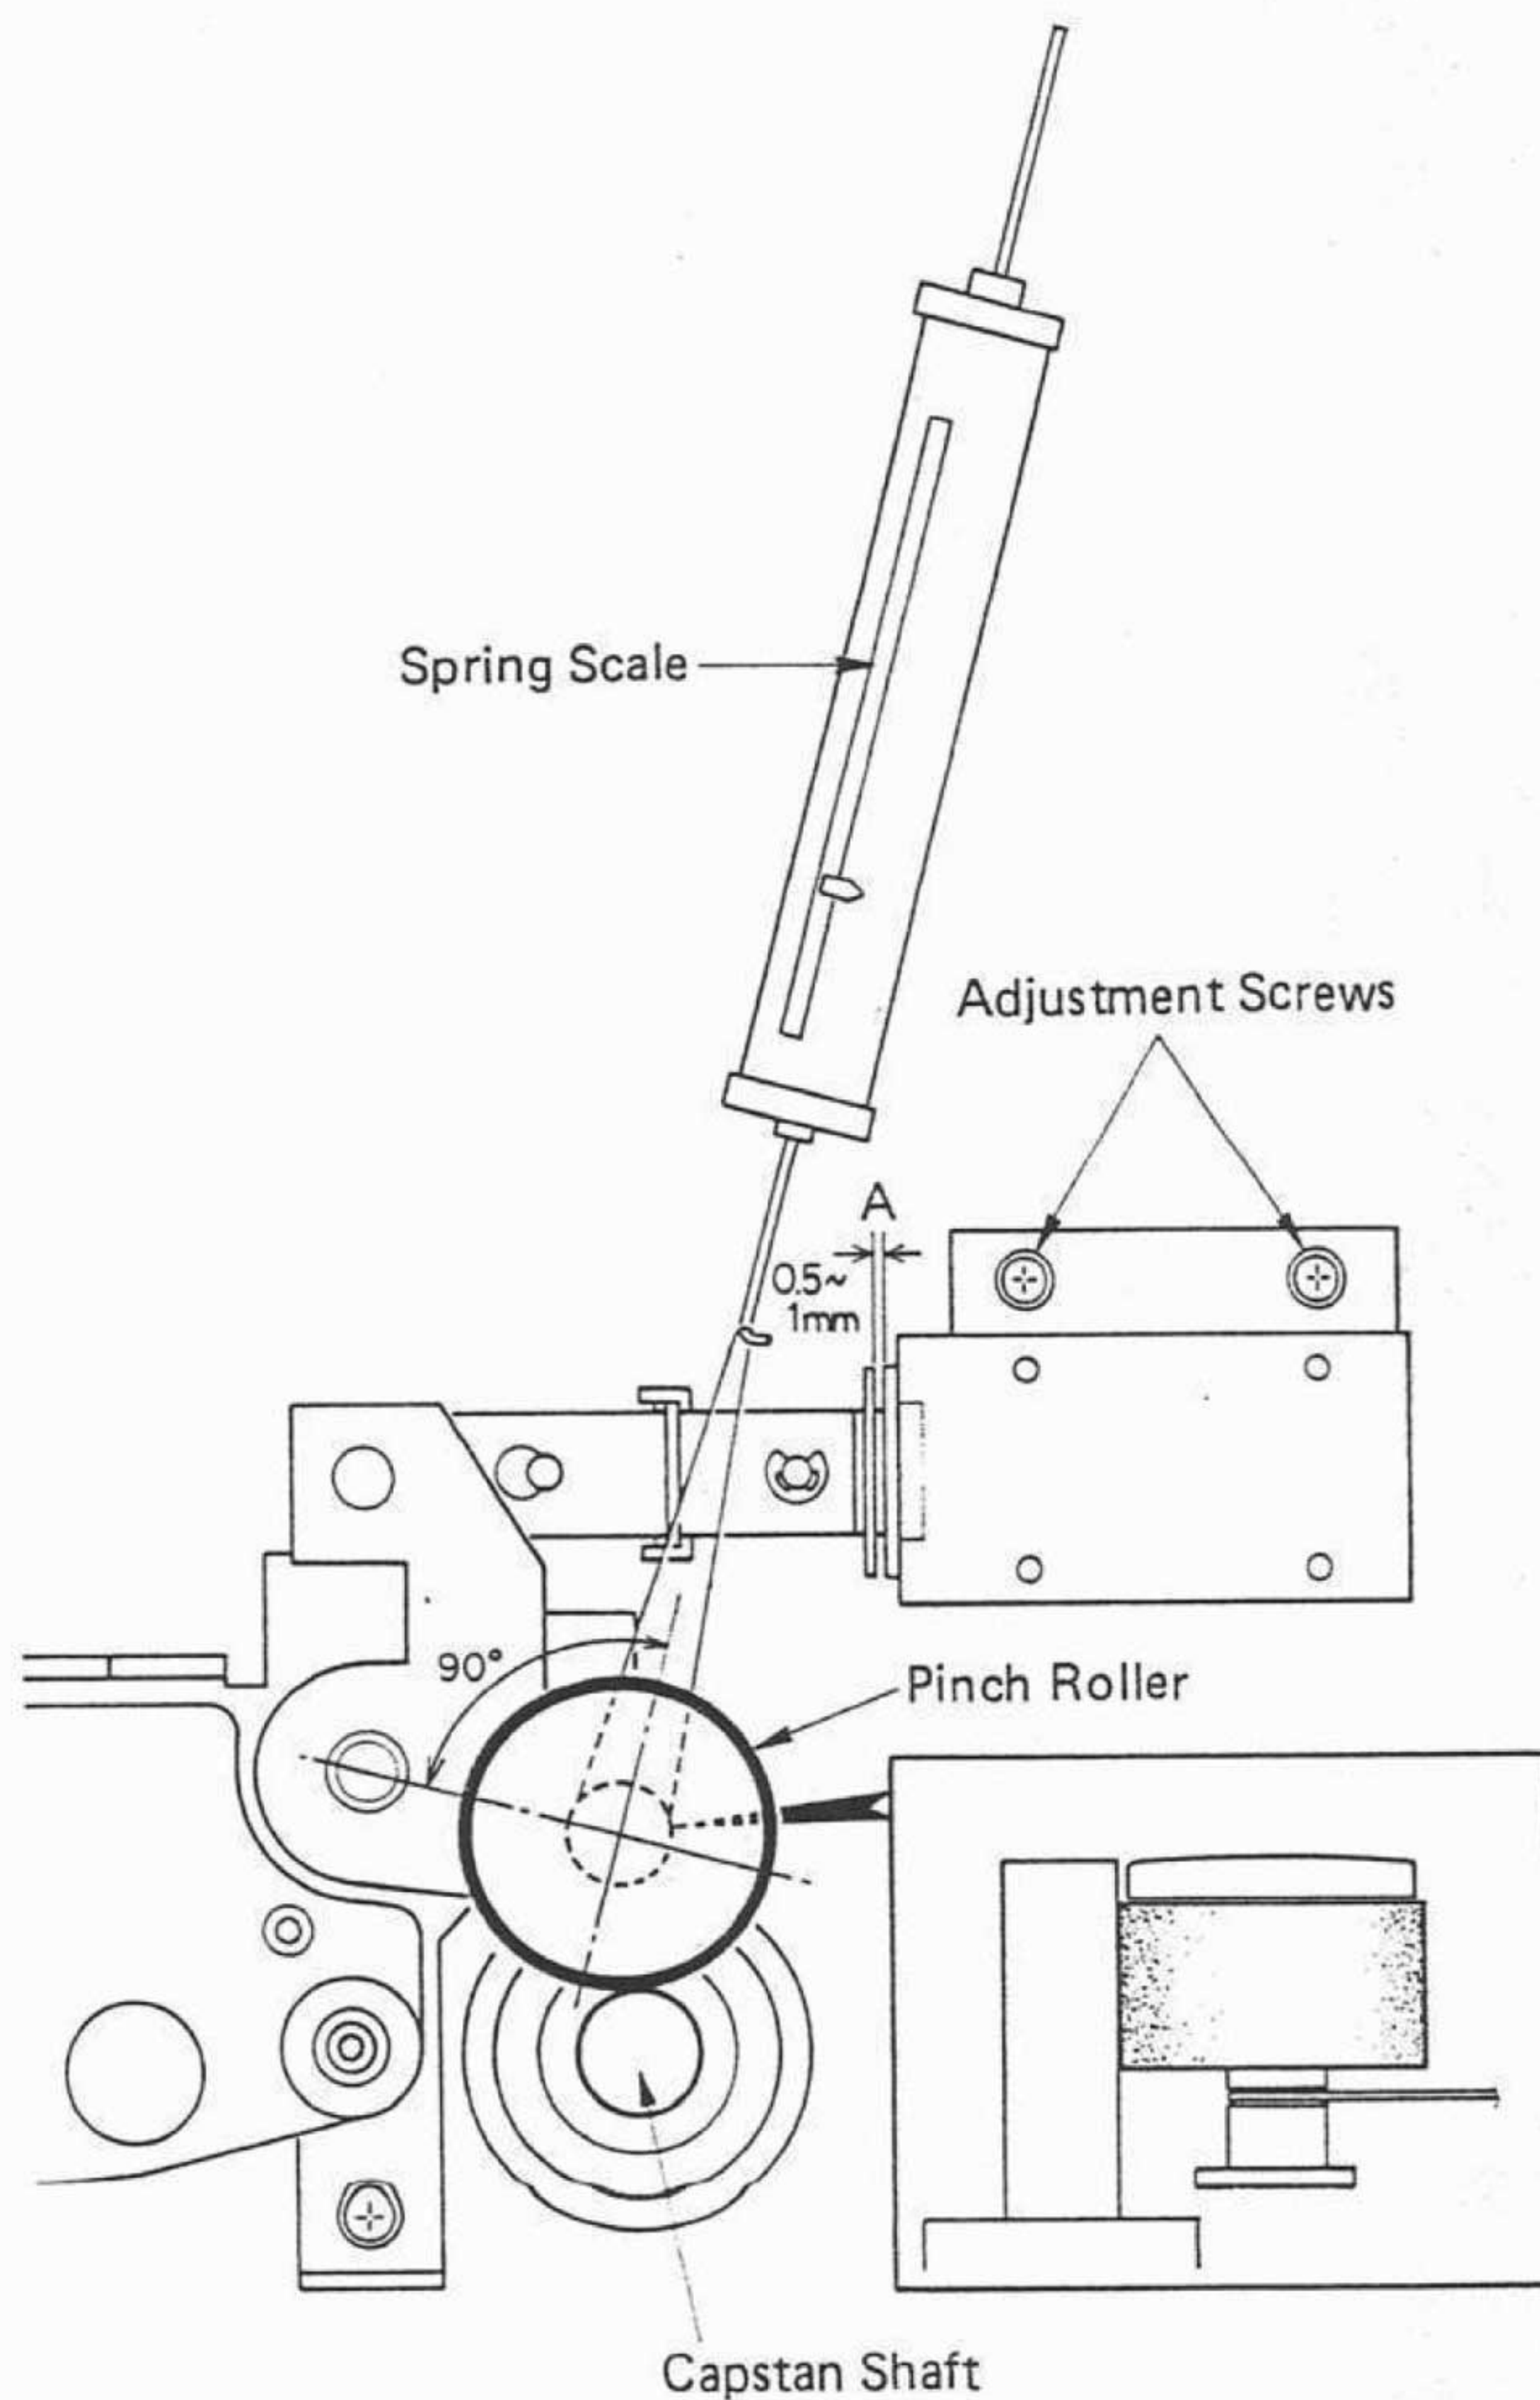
PINCH ROLLER PRESSURE ADJUSTMENT
